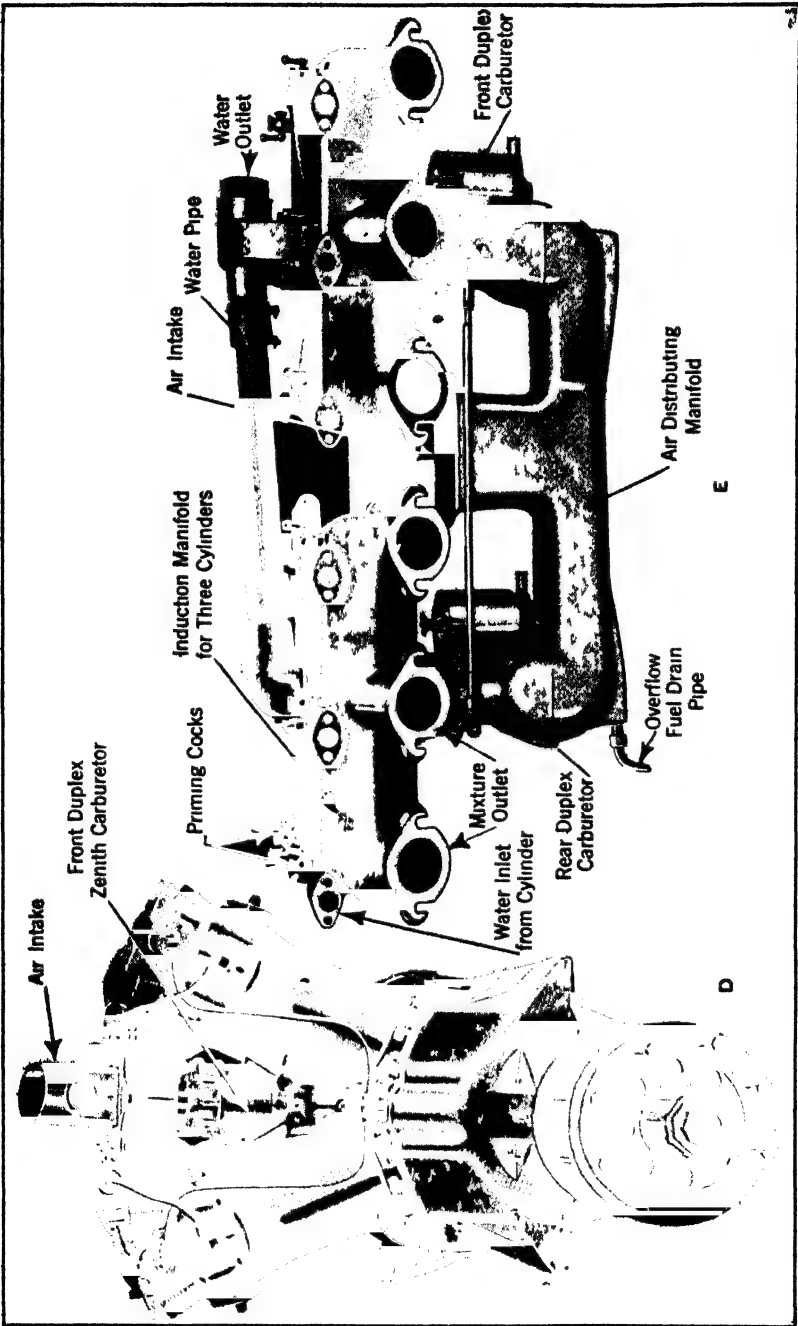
How Zenith Carburetor is Mounted on Liberty Engine Between Cylinder Banks Shown at D. E—Carburetor and Induction Manifold of Liberty Airplane Motor Removed from Cylinder.
